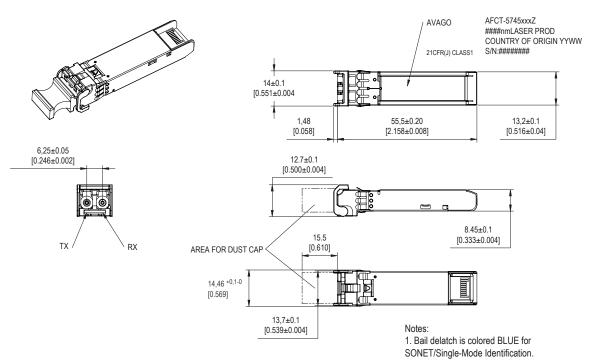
AFCT-57V6USZ Mechanical Outline Drawing
